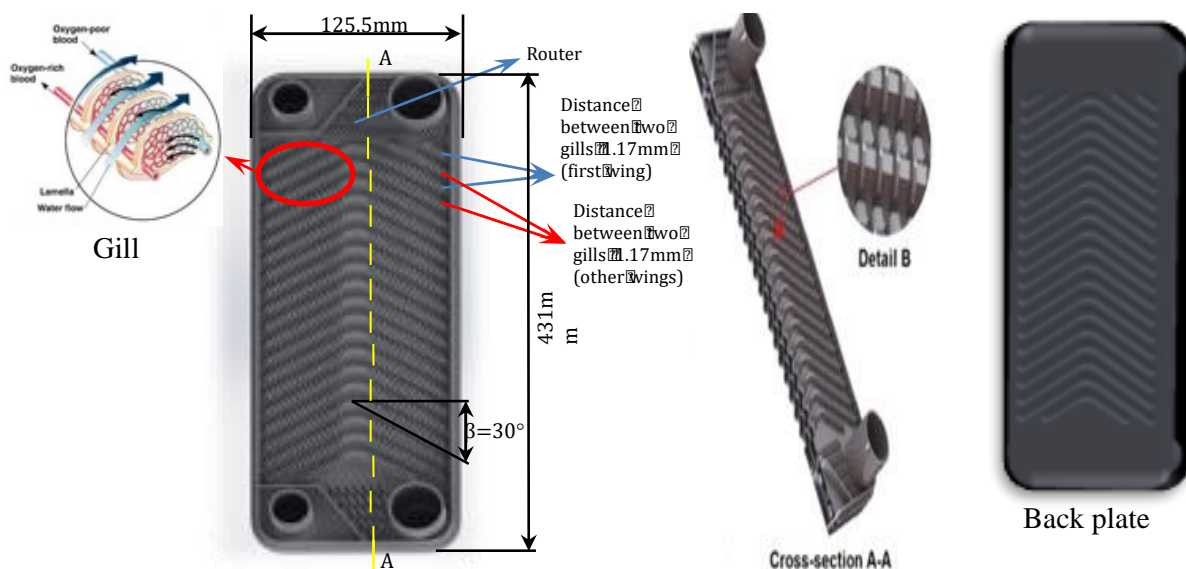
Geometric details of fish gill pattern compact PHE designed.
